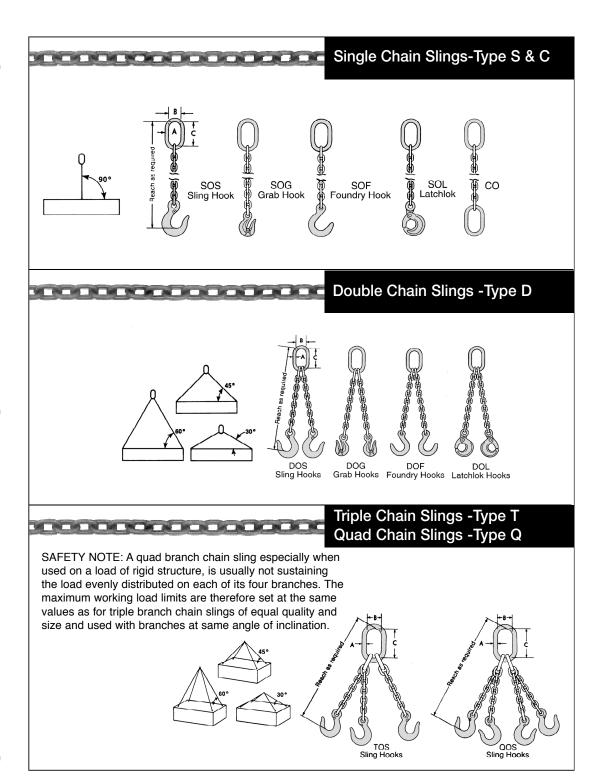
CM GRADE 80 AND 100 HERC ALLOY WELDED CHAIN SLINGS
